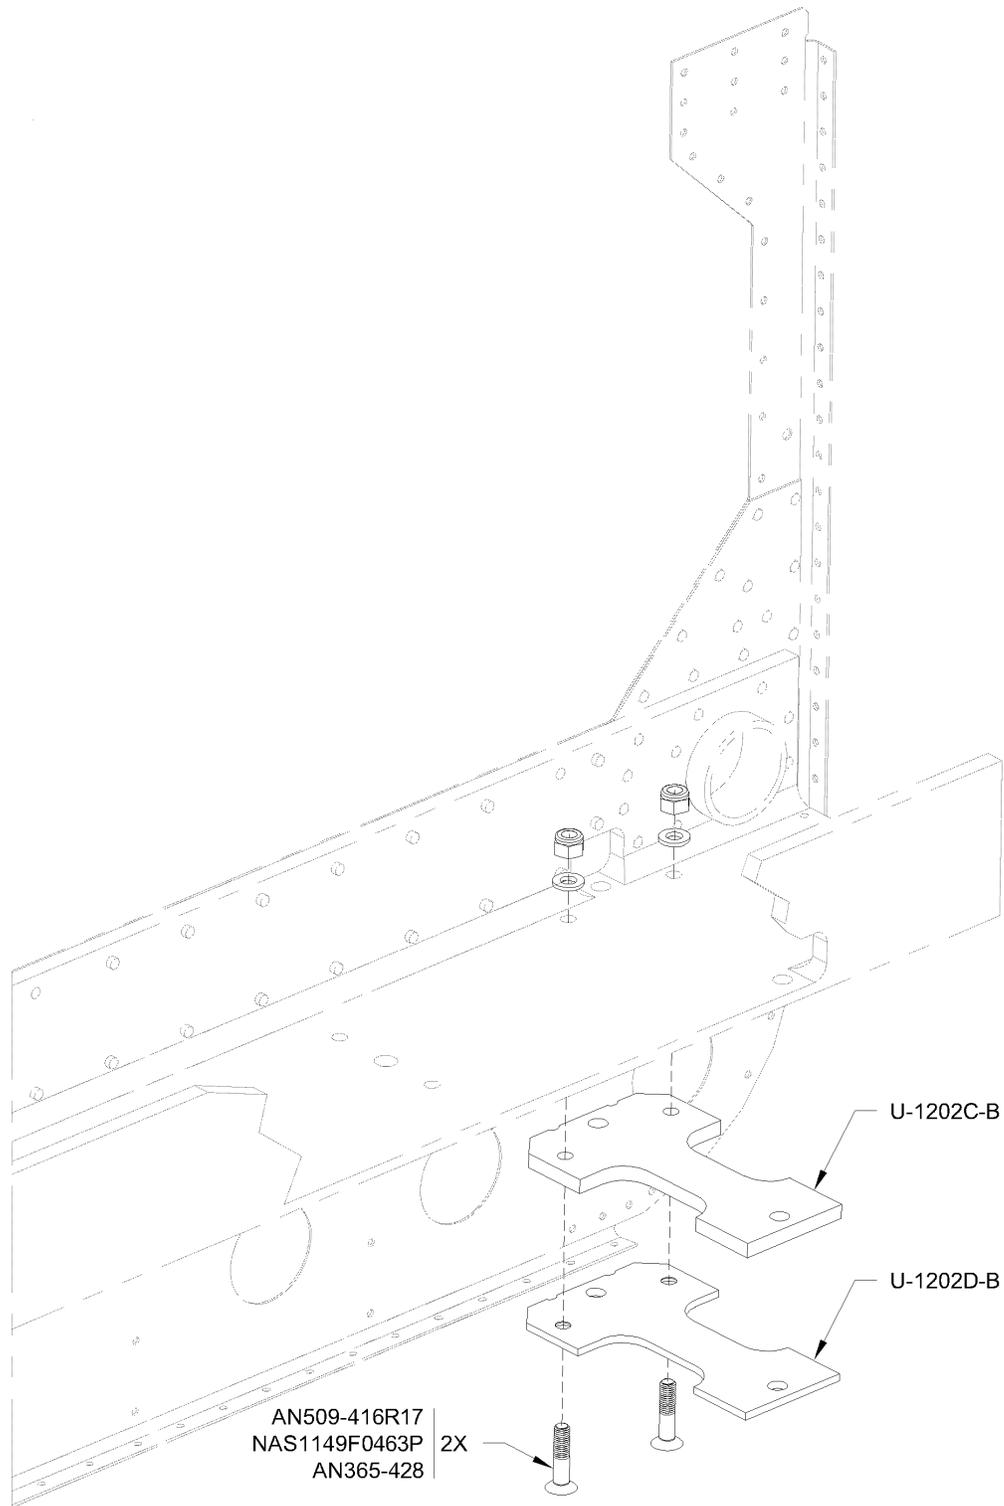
INSTALLING THE OUTBOARD DOUBLER AND WEAR PLATES
